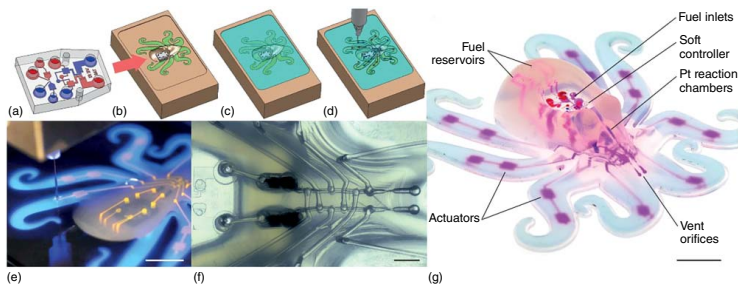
Soft robot assembly printed by DIW technology. (a–f) Fabrication steps of the assembly, including loading a prefabricated microfluidic soft controller into a mold and printing hydrogel inks. (g) The fabricate robot is removed from the mold and inverted to reveal a fully soft, autonomous robot. Source: Wehner et al. 2016 [116]. Reproduced with permission of Springer Nature.
